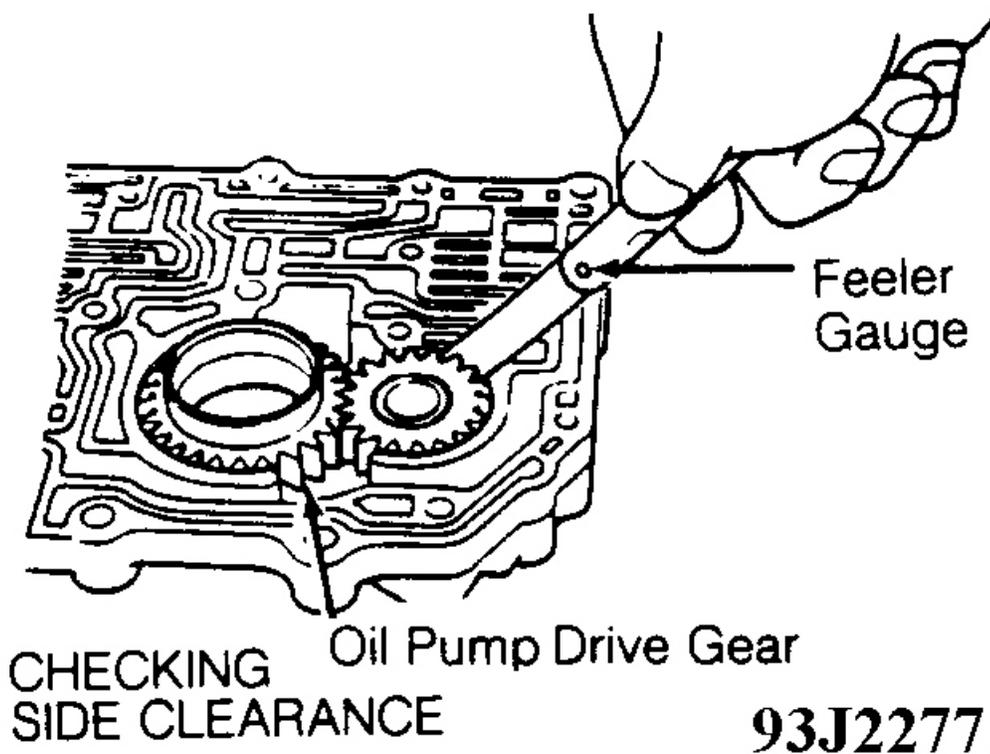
Measuring Oil Pump Clearances (2 of 2)
